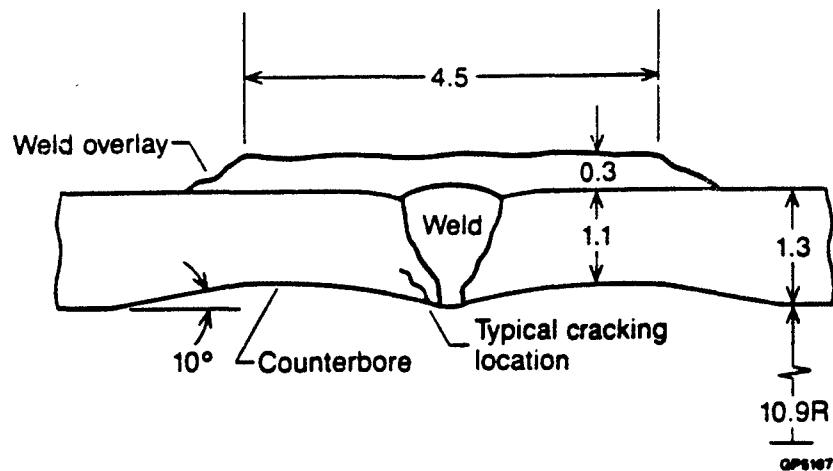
Weld overlay repair of a precracked 24-inch pipe.
